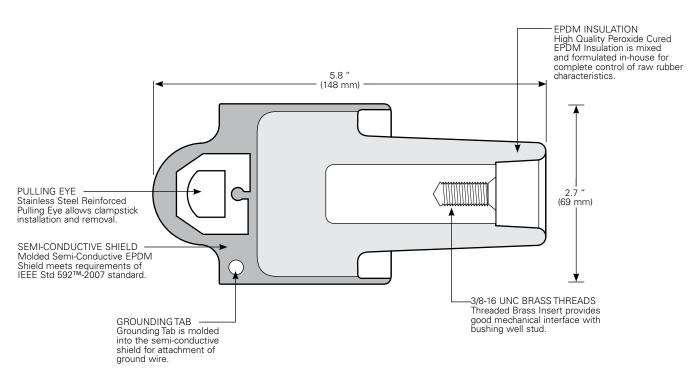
Dimensional drawing shows insulation layers and threaded brass insert for solid interface.
